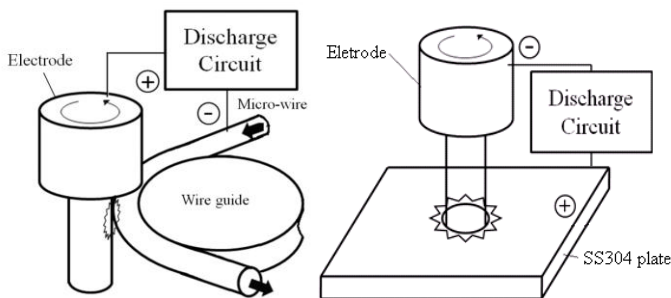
a. Diagram of WEDM(Wire Electrical Discharge Machining)
